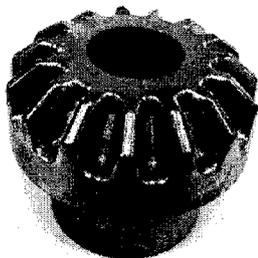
Trial gear 2, machined by Roders-RFM600 under the machining condition 1
